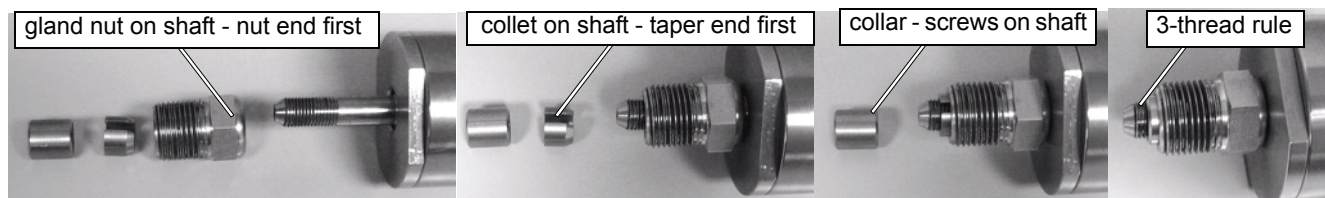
Install the Gland Nut, Collet, and Collar onto the Swivel Shaft
